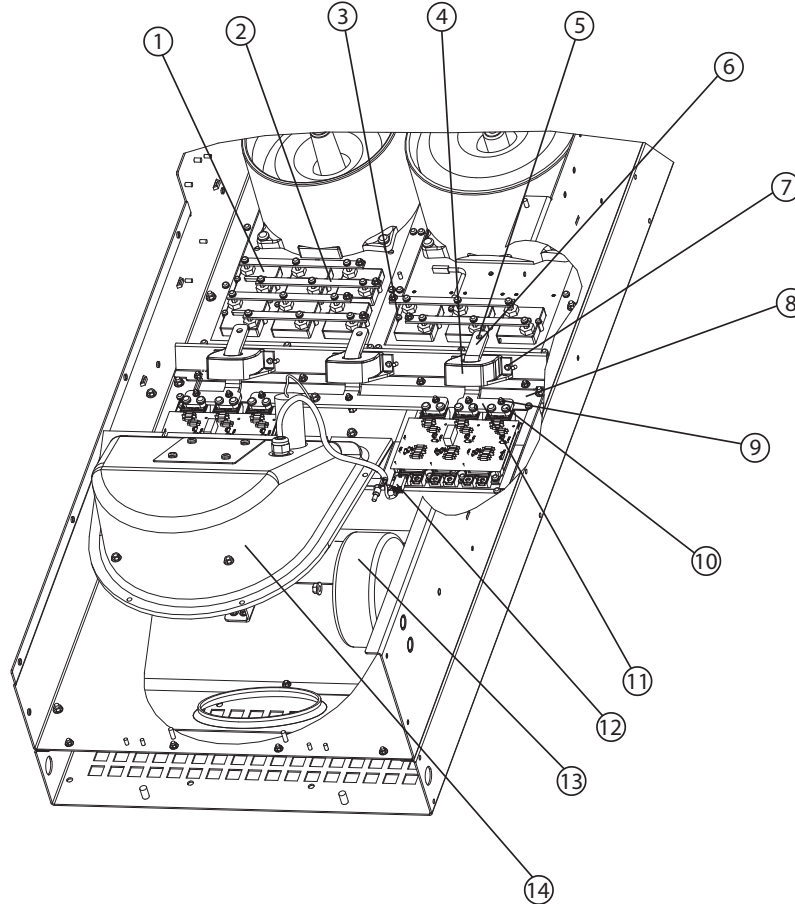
IGBT Current Sensor, Fan and Fan Transformer, and Damping Resistors
